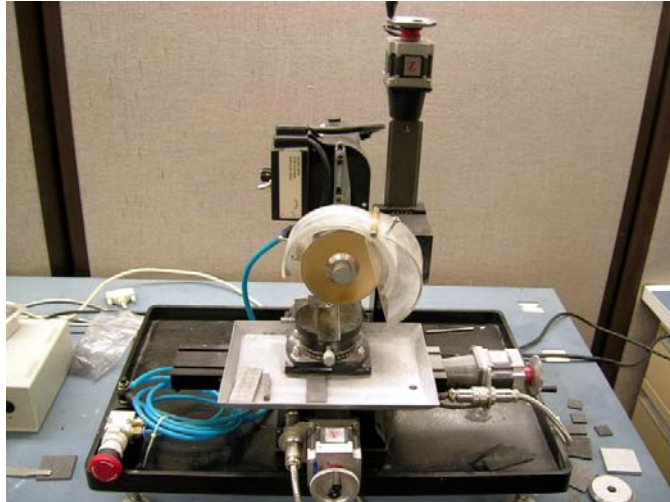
MTI Corporation EC400 CNC saw used to cut the fracture surfaces.
